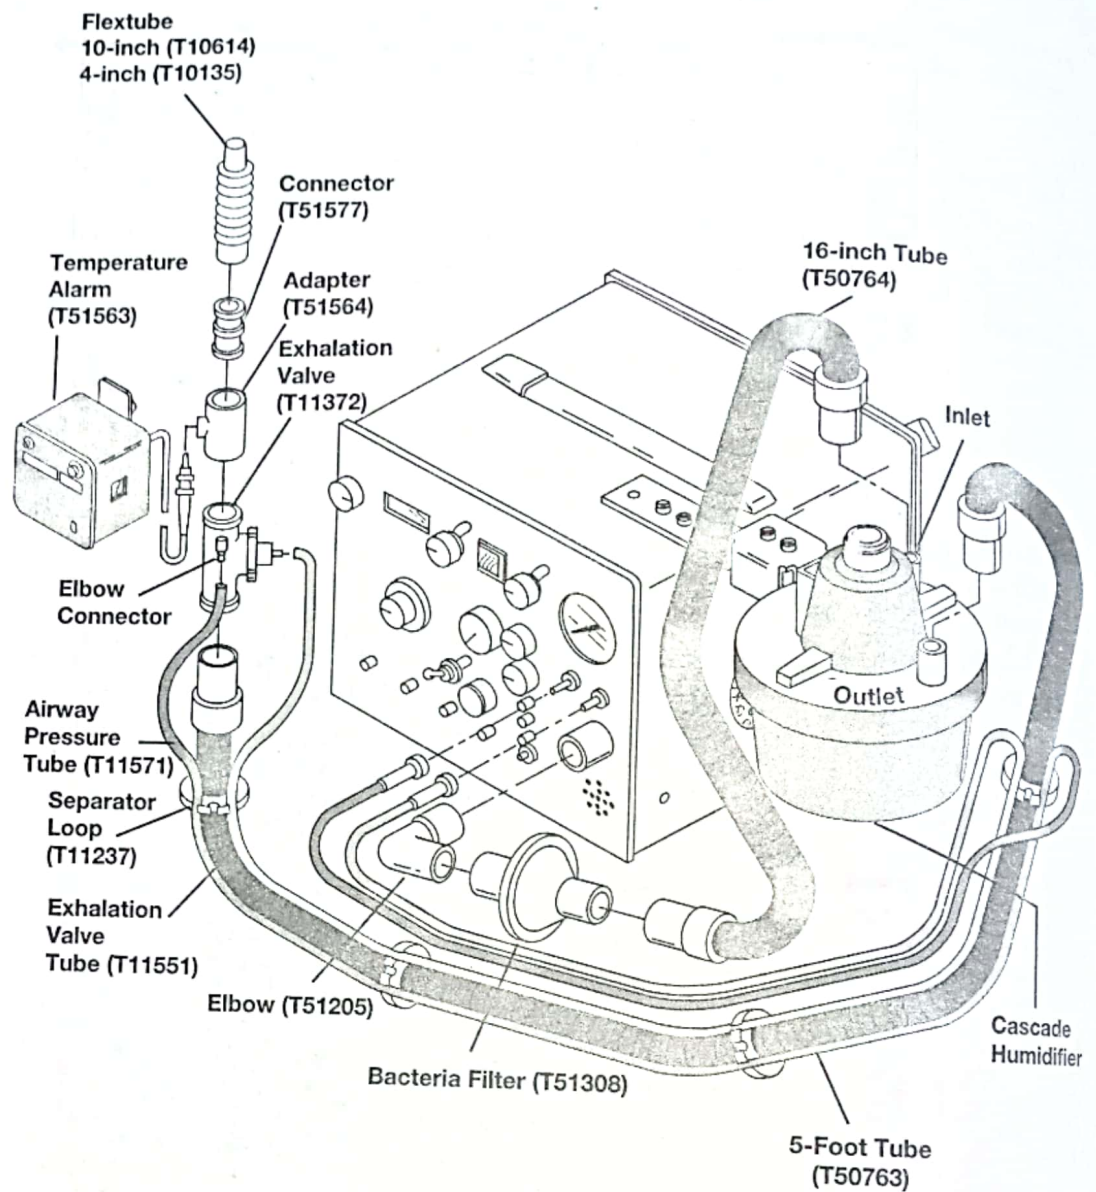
Line Drawing of Ventilator (Exploded View with Call-outs)
